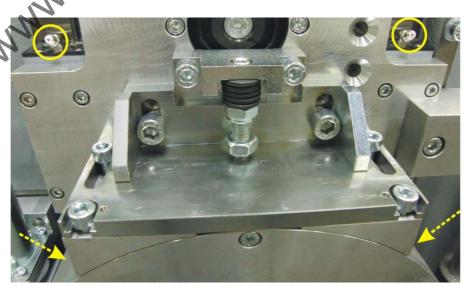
Lubricating nipples, saw unit tilting to both sides
